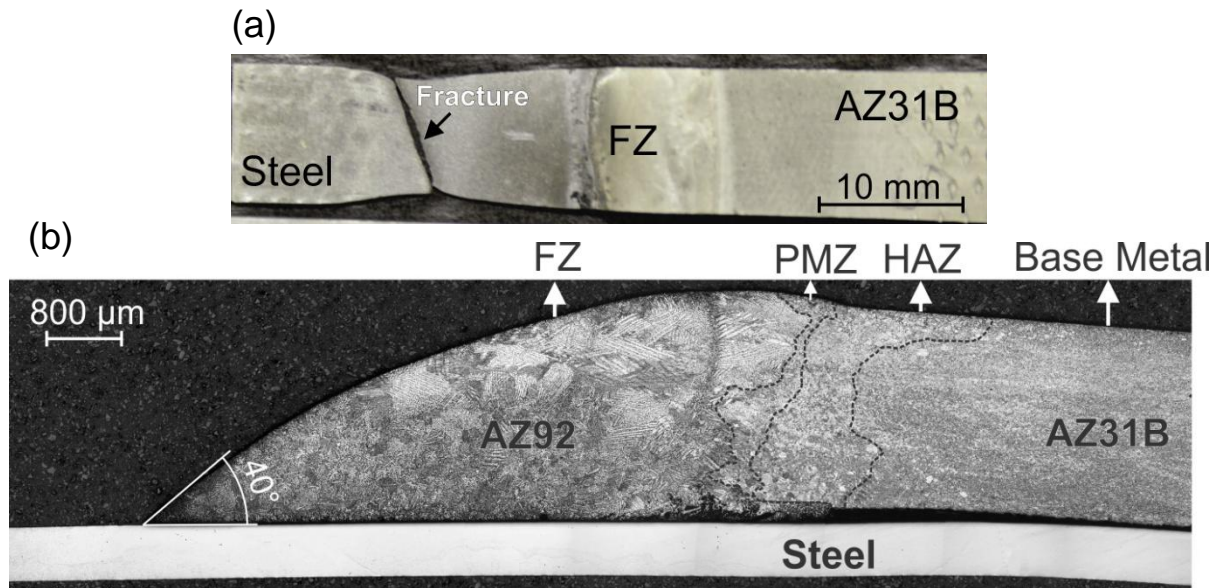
(a) a typical fractured specimen after tensile shear test of the laser brazed joint and (b) transverse section of a laser brazed Sn electro-plated steel/AZ31B joint made using 2.2 kW laser power, 8 mm/s travel speed, and 0.2 mm beam offset to the steel side.
